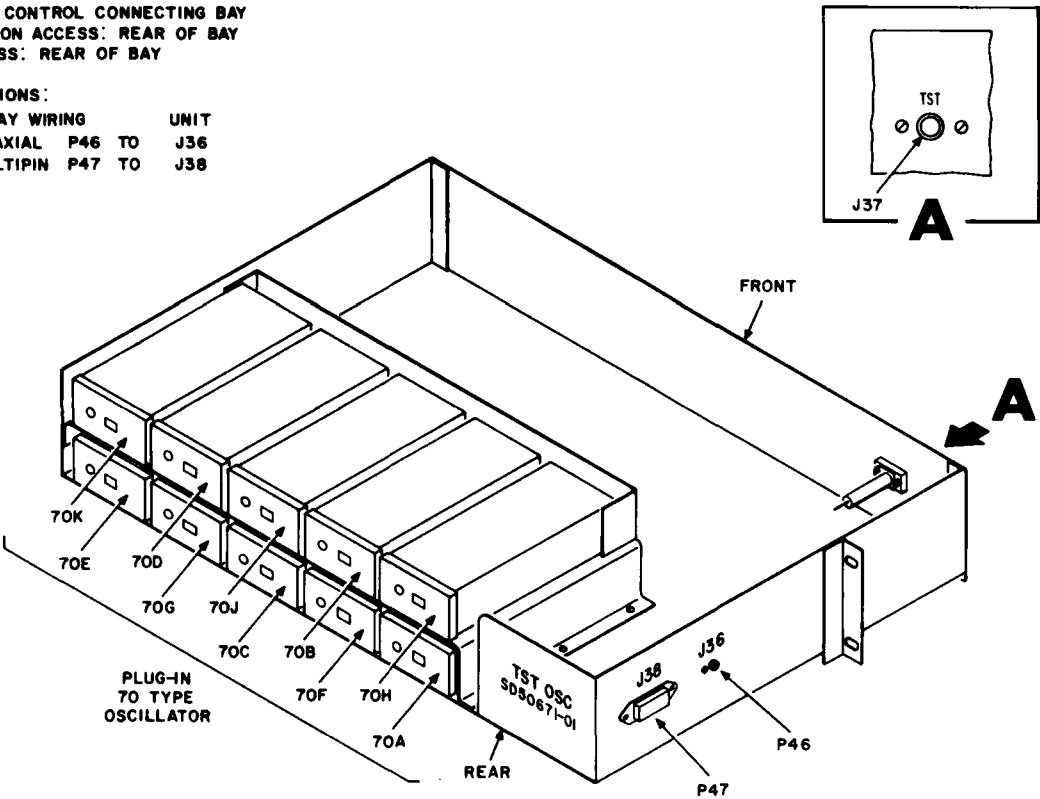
B Equalizer Test Oscillator Panel J68877BB
